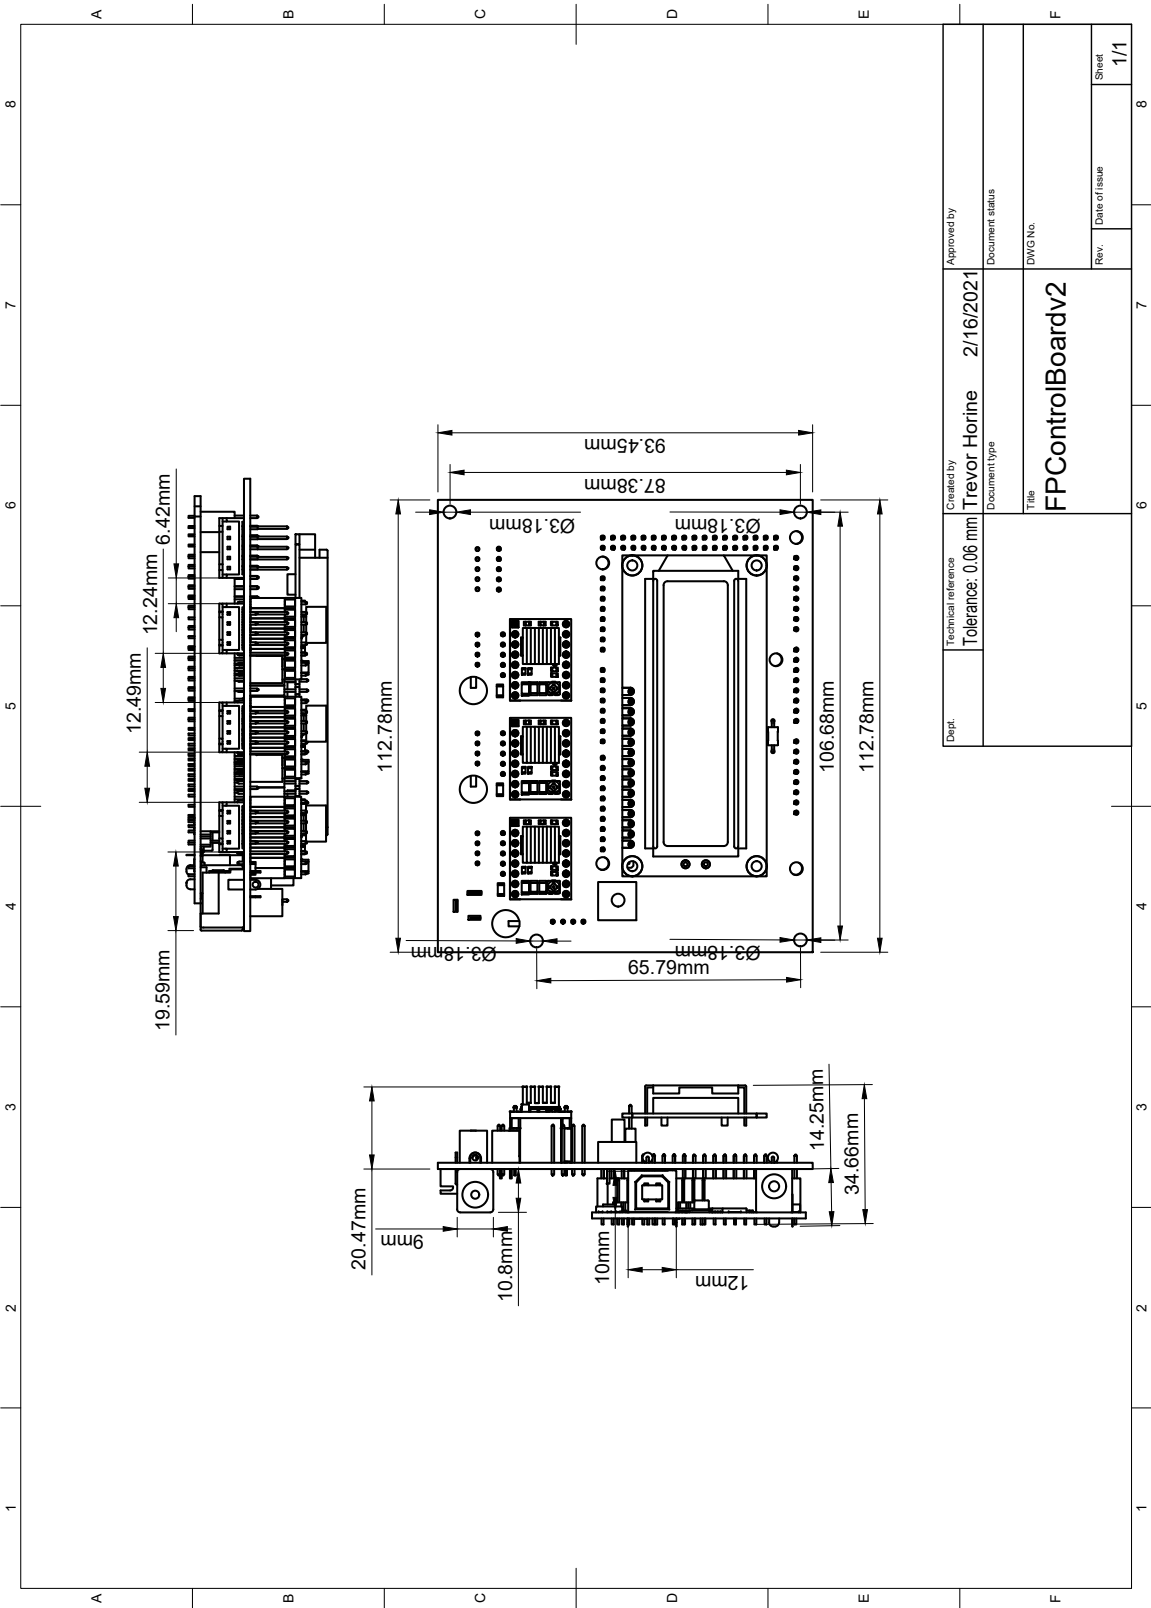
Mechanical drawing of PCB, with dimensions and locations of mounting holes
